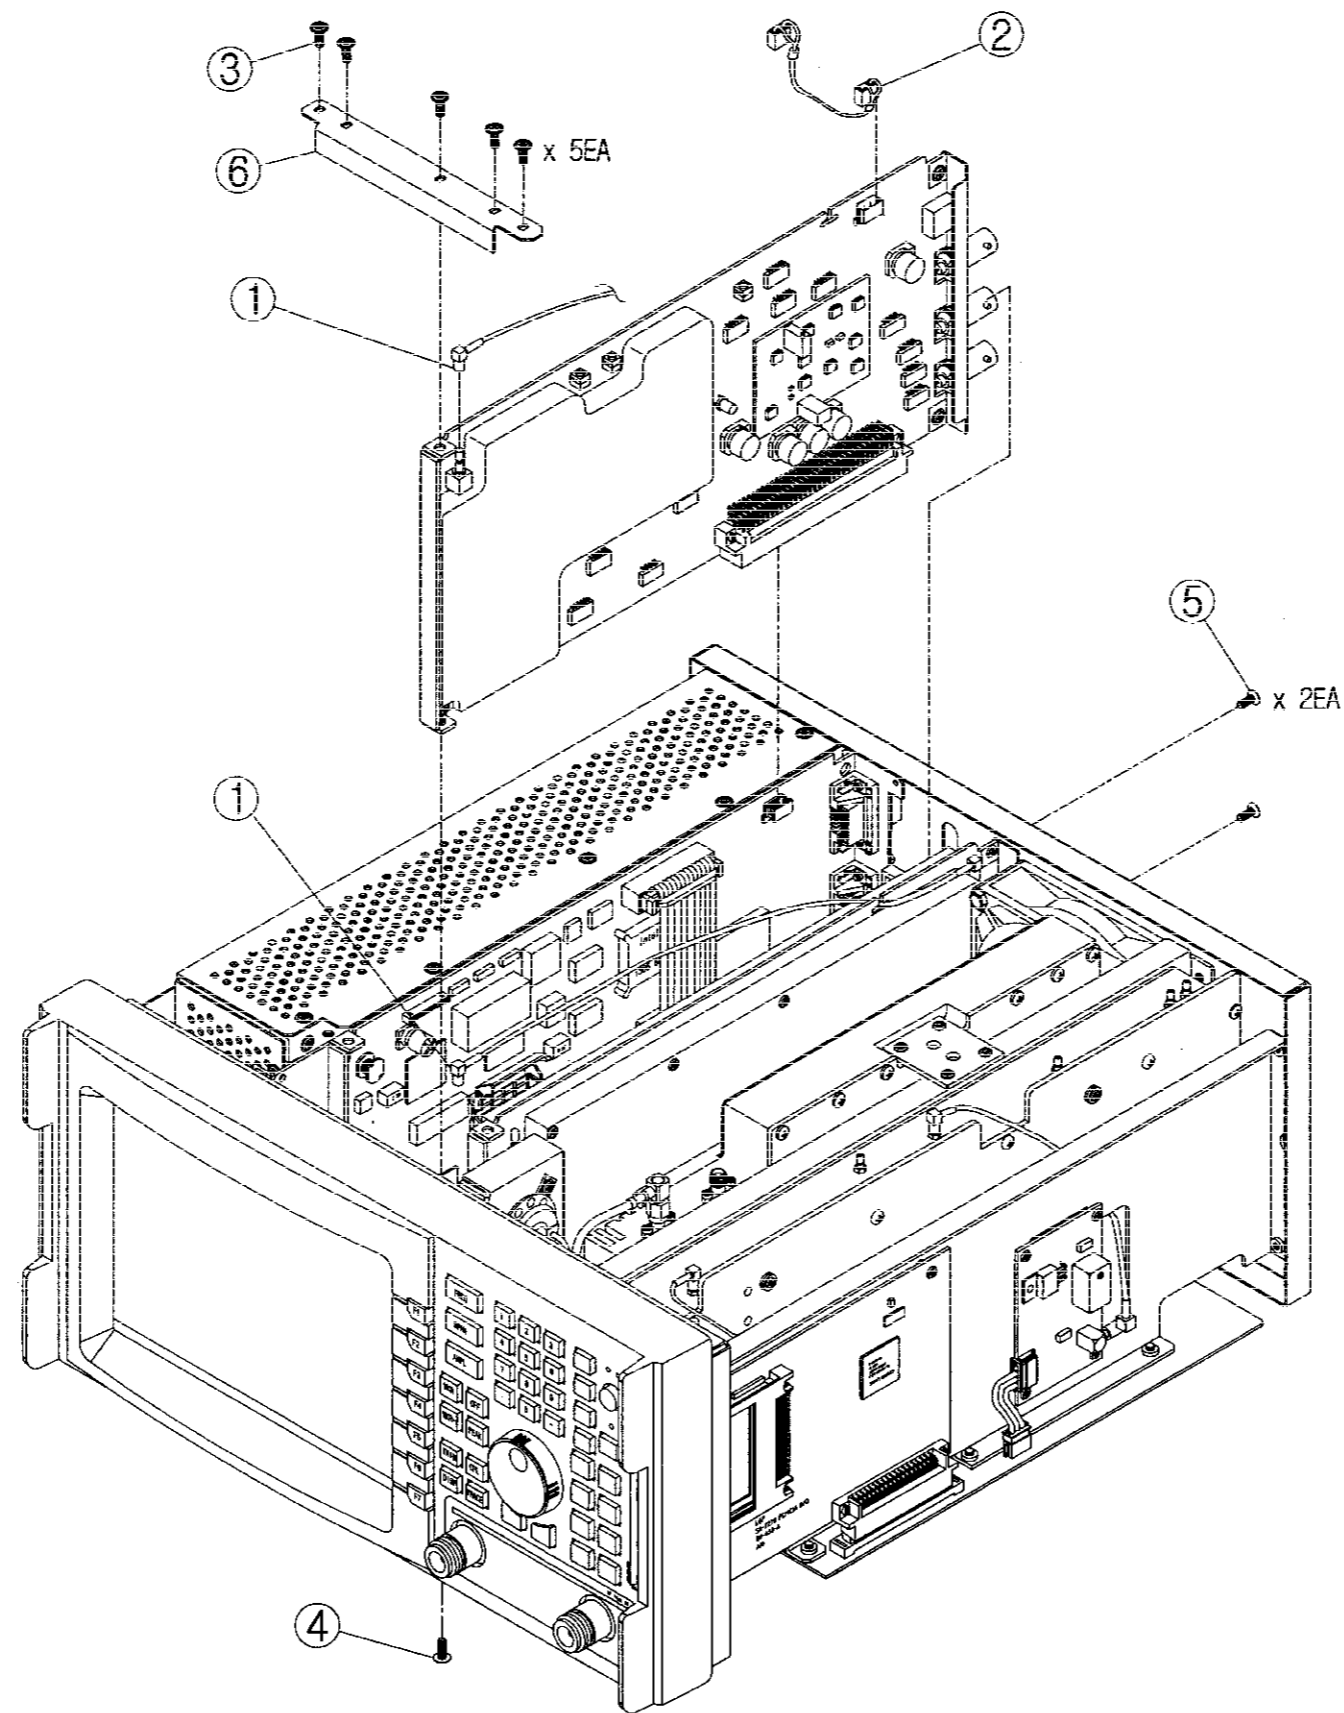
VIDEO DETECTOR BOARD ASSEMBLY
